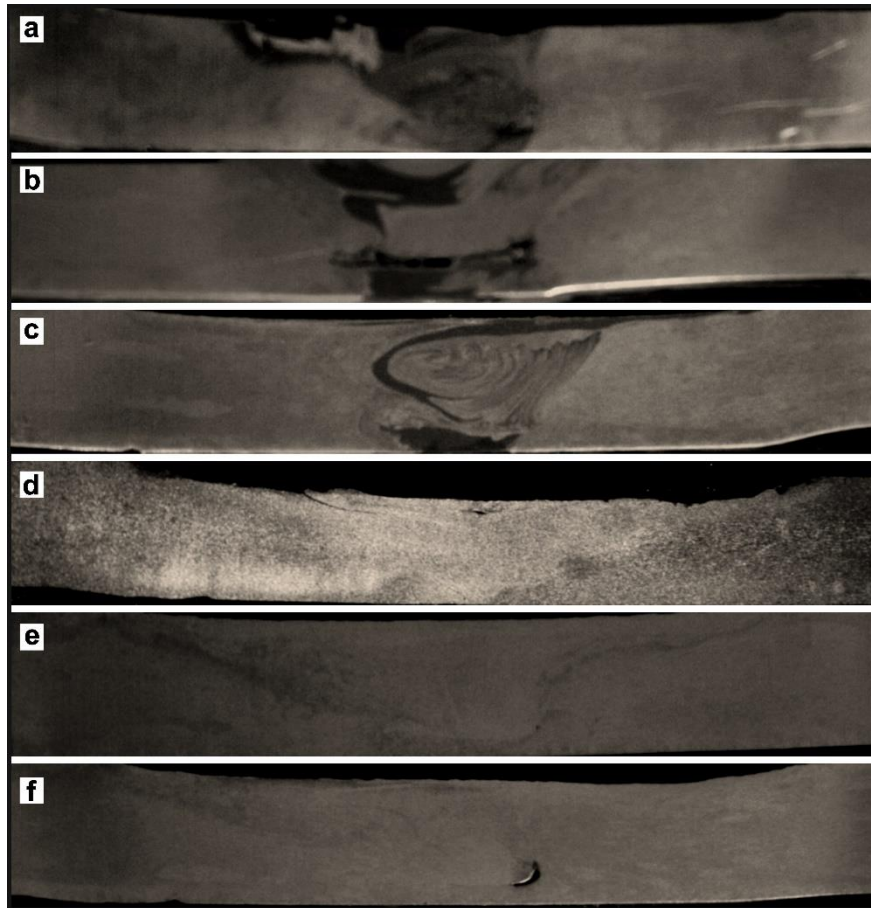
The macrostructure of FS welded samples [(a, E1), (b, E2), (c, E3), (d, E4), (e, E5), (f, E6)]
